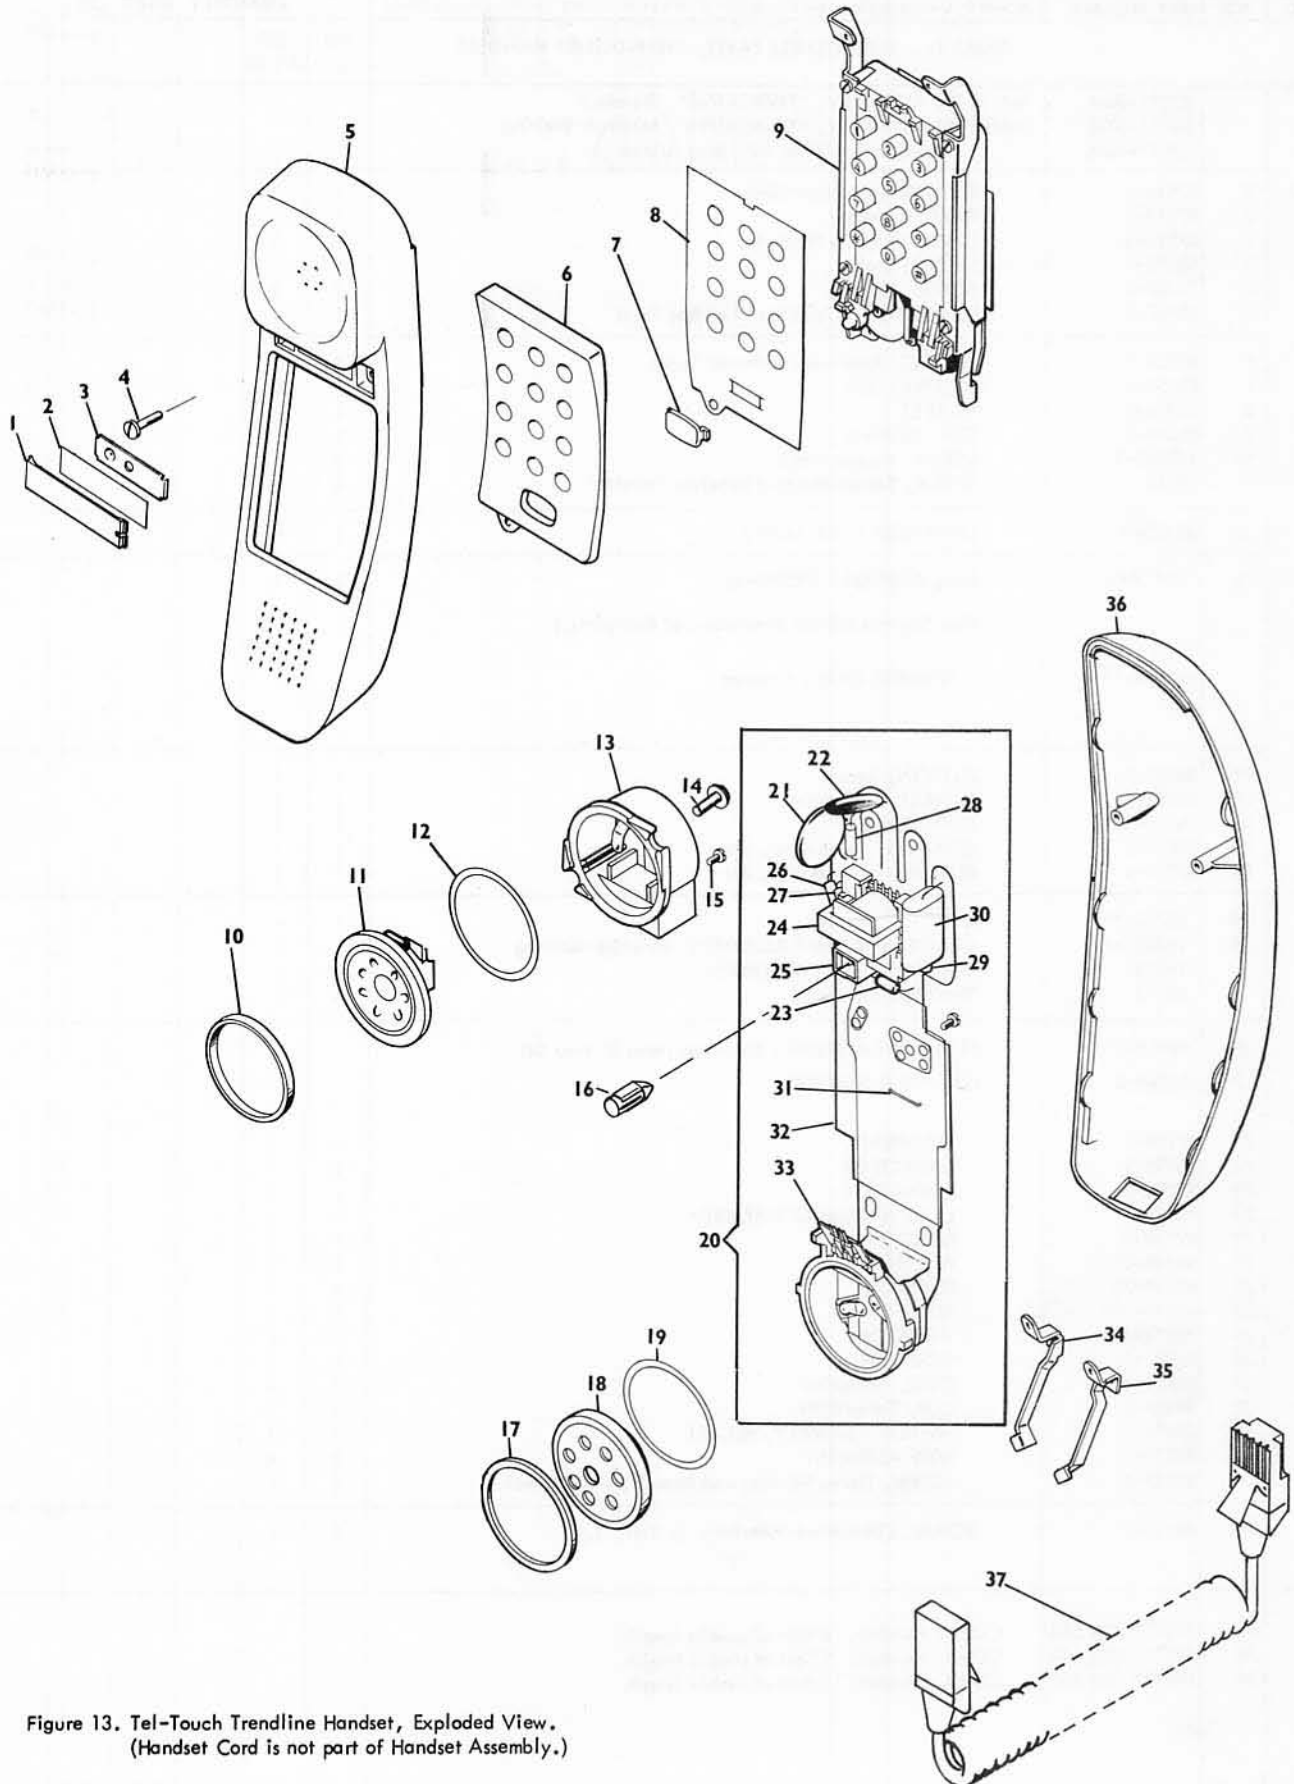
Tel-Touch Trendline Handset, Exploded View.
